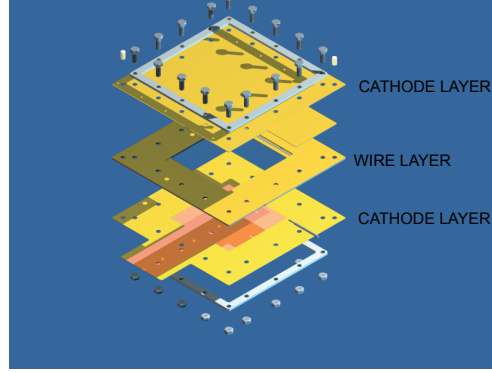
Engineering drawing of a MSPET prototype chamber.
